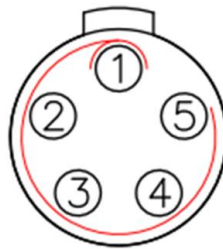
Welding Surface at Port B of the Data Cable (HJ681)
